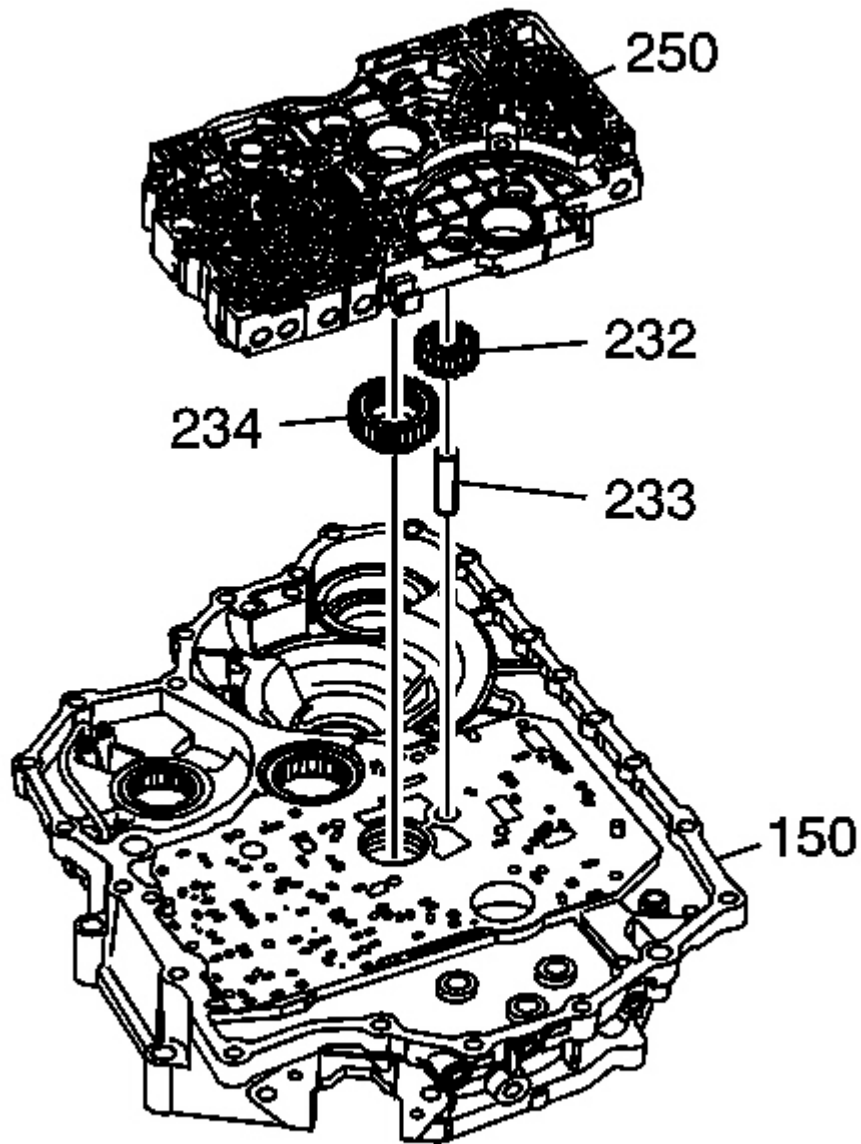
Control Valve Body, Fluid Pump Driven Gear & Pin
